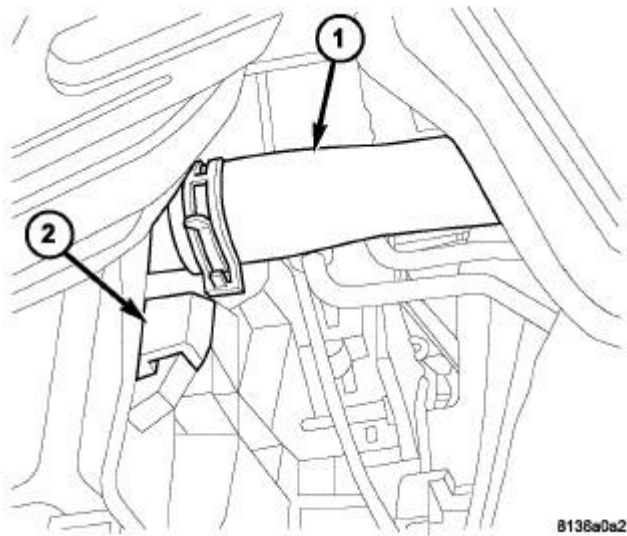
Lower Radiator Hose & Radiator Fan Assembly
